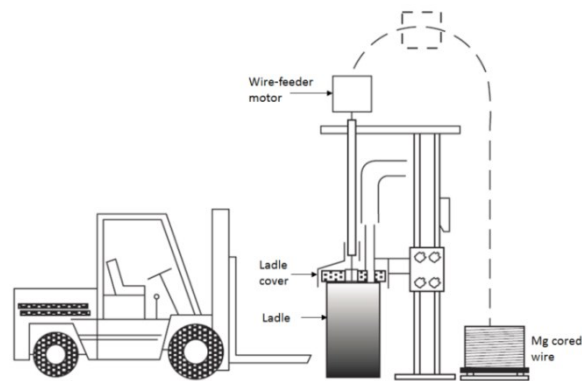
Illustration of a wire-feeder machine for addition of Mg cored-wire [19].
